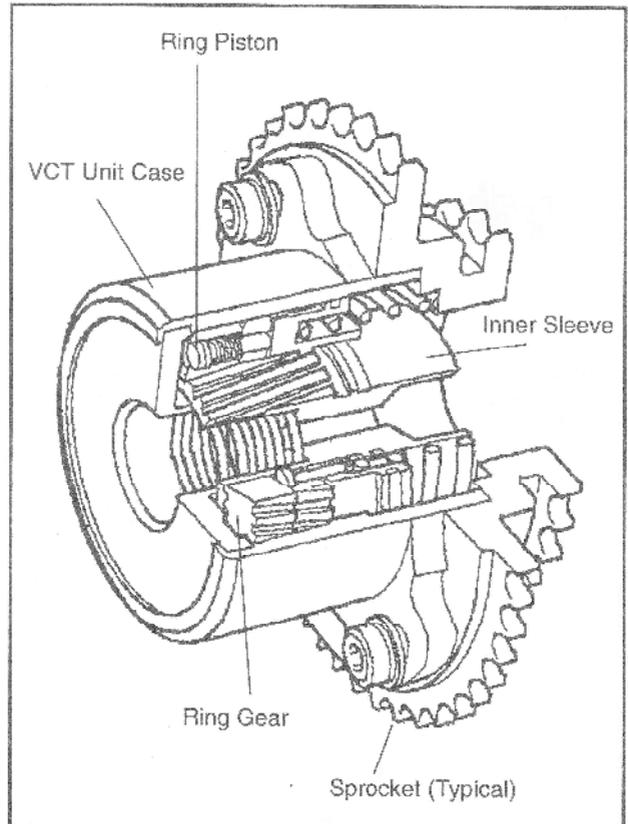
VCT assembly (Typical - not Falcon Sprocket)
